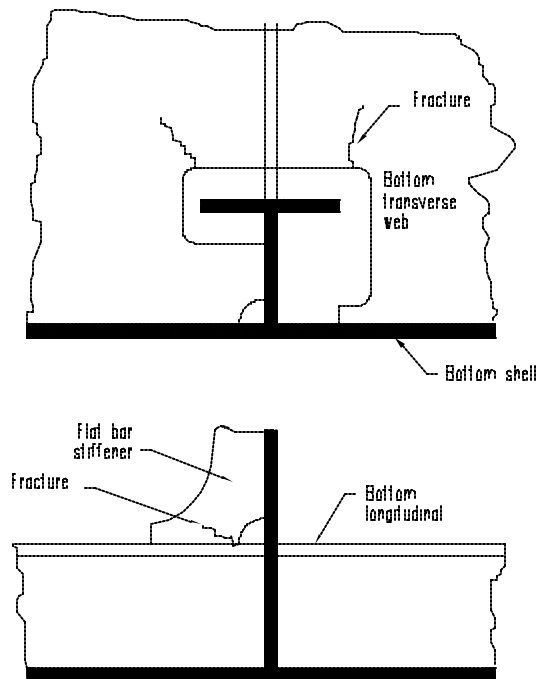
Web and flat bar fractures with face plate attached to underside of web, flat bar butt welded.
